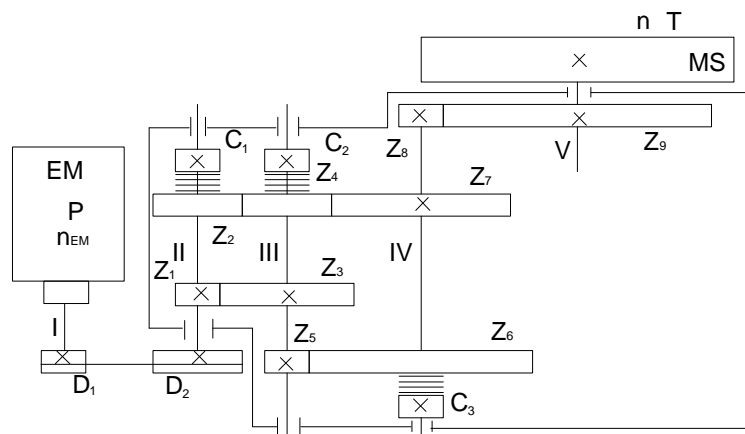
Gearbox with vertical shafts and electromagnetic clutches.
